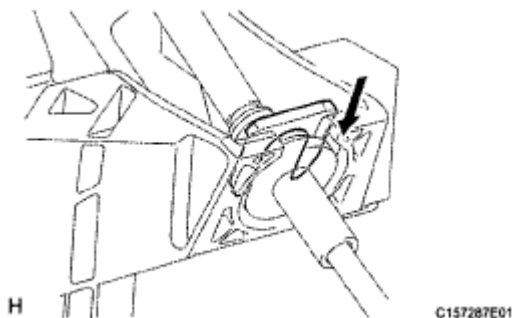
Identifying Cable Outer Of Transmission Control Cable To Shift Lever Retainer
